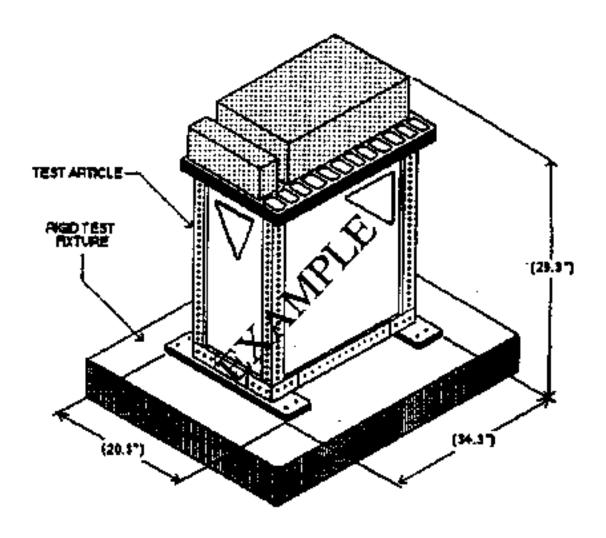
ALAE/CMU SUPPORT STAND ASSEMBLY TEST SETUP
